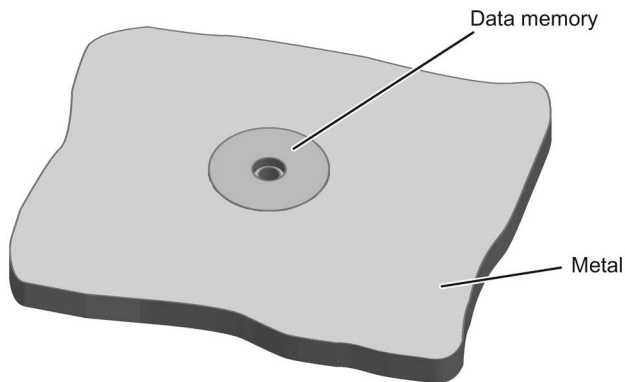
Flush-mounting of the MDS D423 in metal without clearance
